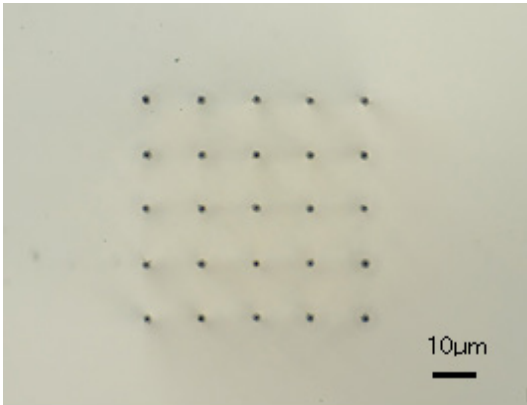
Bottom view of micro-vias fabricated in 500 μm thick glass.
